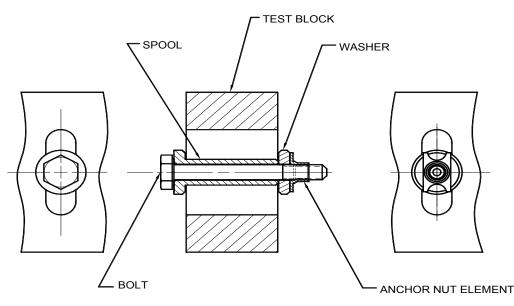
NASM1312-7 TEST ASSEMBLY
